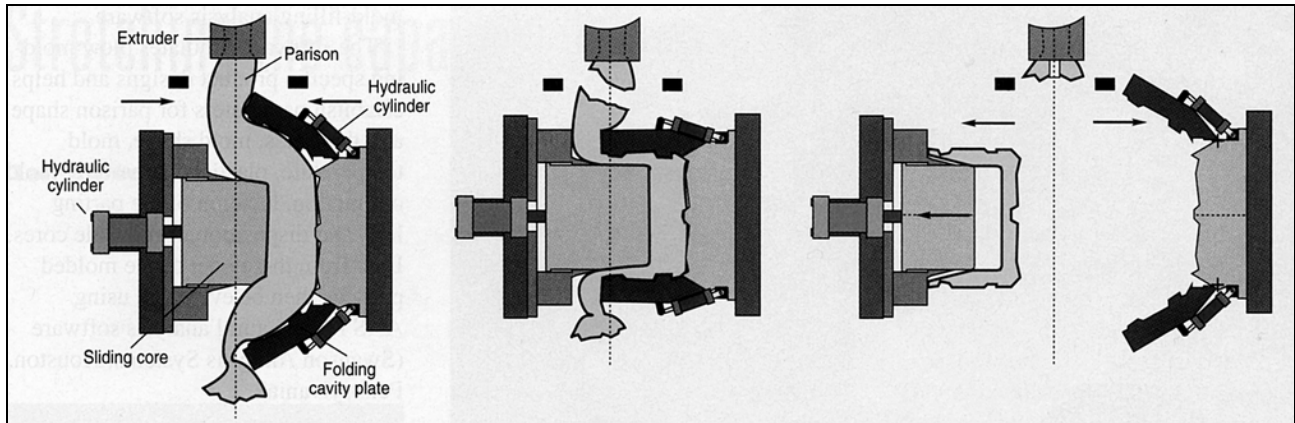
Placo process for 3D blow molding. . Key: A = mold begins to close on pre-pinched and pre-blown parison, B = mold fully closed with core forward and side walls hinged in, C = mold open and core retracted
